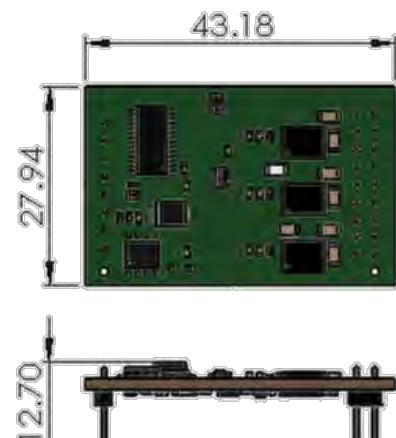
DEC 50/5 Maxon Motor Controller Dimensions (mm)
